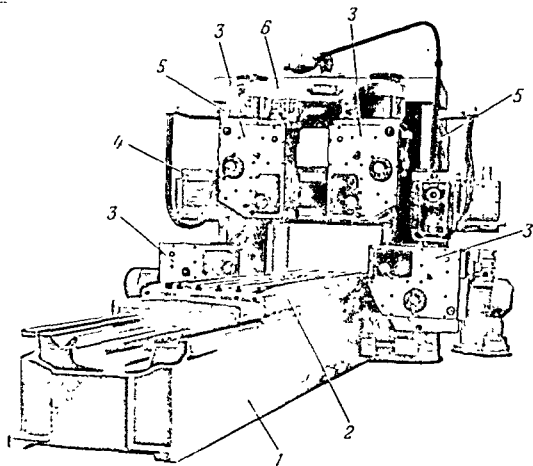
Double-housing planer-type milling machine, model 6610, with two vertical and two horizontal spindles.
